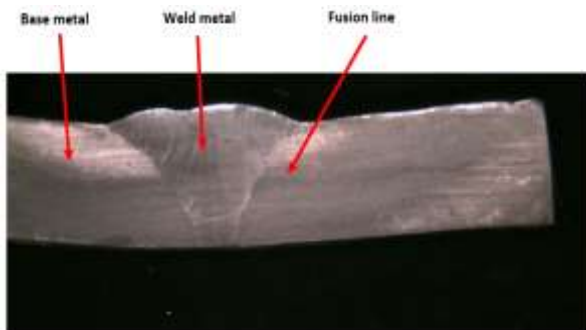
Macroprofile of stainless steel welded at heat input of 1250 J/mm.
